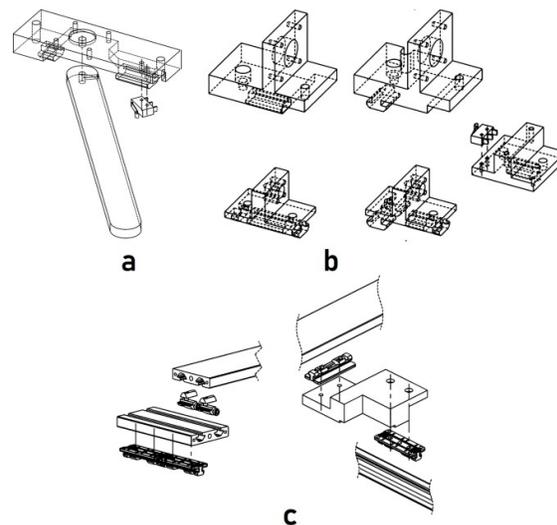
Component details: a – rotating panel stop sub-assembly; b – custom bases for stepper motors, bearing blocks, limit switches; c – POM sliders between extruded profiles.
